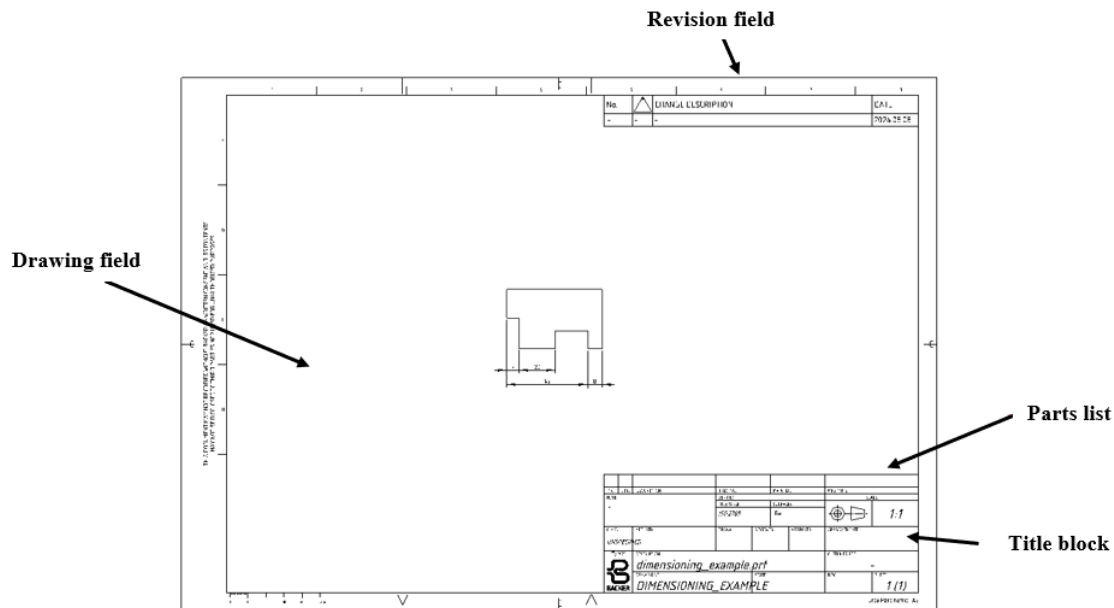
A3 Assembly drawing template showing the drawing field, revision field, parts list, and title block.
